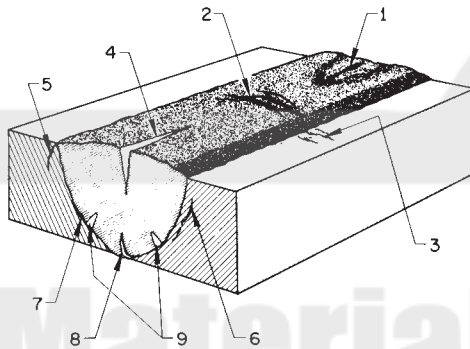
Identification of cracks according to location in weld and base metal. 1, crater crack in weld metal; 2, transverse crack in weld metal; 3, transverse crack in HAZ; 4, longitudinal crack in weld metal; 5, toe crack in base metal; 6, underbead crack in base metal; 7, fusion line crack; 8, root crack in weld metal; 9, hat cracks in weld metal. Source: Ref 1
